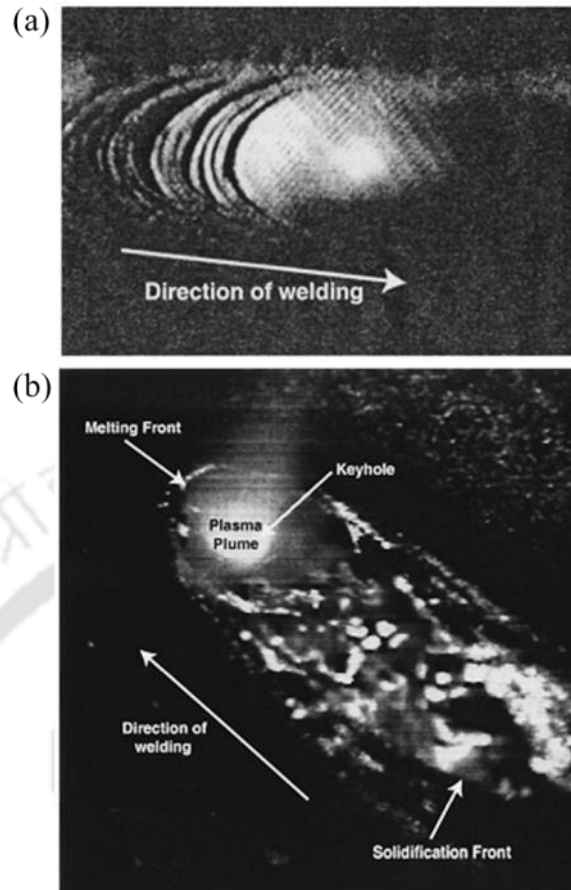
High speed charge coupled device (CCD) camera pictures of molten weld pools, (a) Conduction-mode laser welding and (b) Keyhole-mode laser welding [107].
